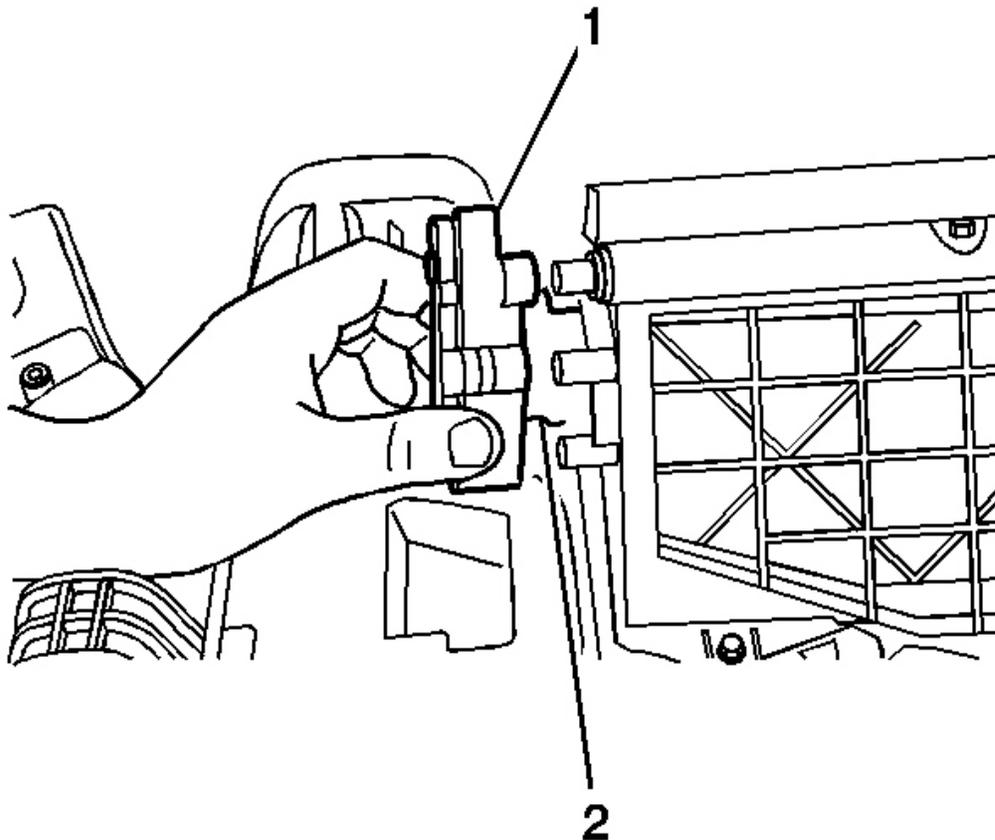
Recirculation Actuator & Recirculation Housing (Visteon)
